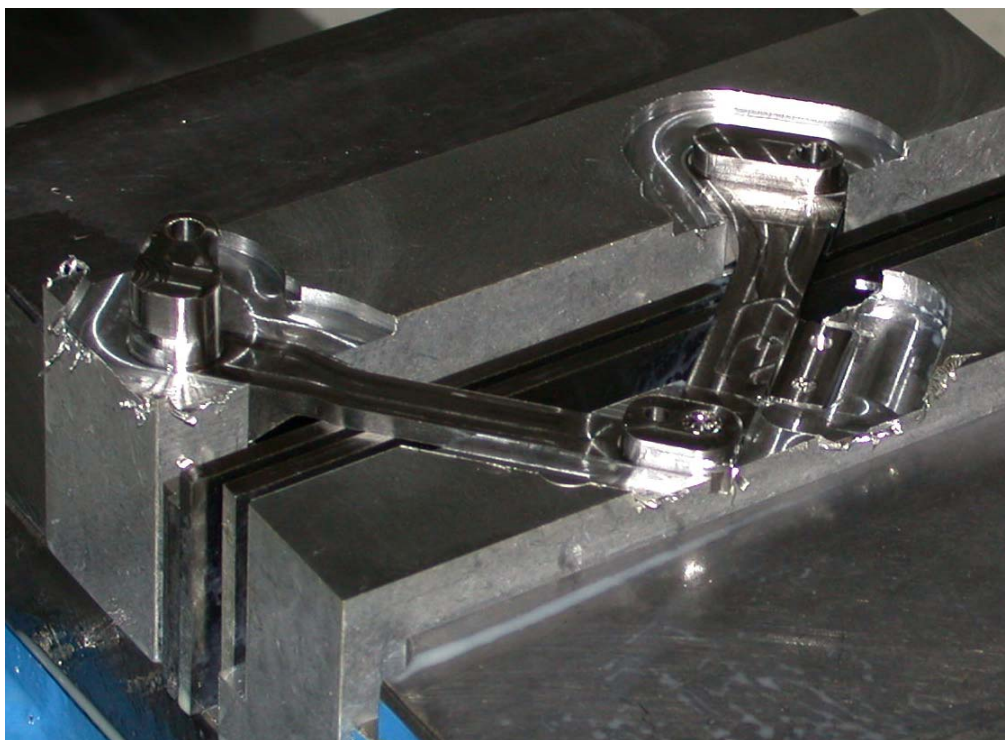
Bracket Shown in the Softjaw Fixture for Machining of the Bottom Side
